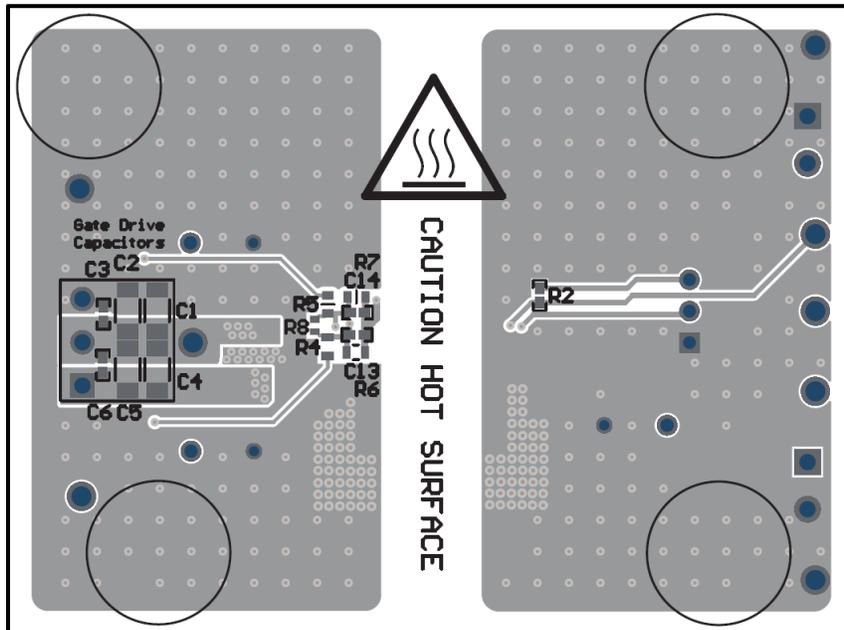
UCC14131EVM-070, PCB Bottom Layer, Assembly (mirrored view)
